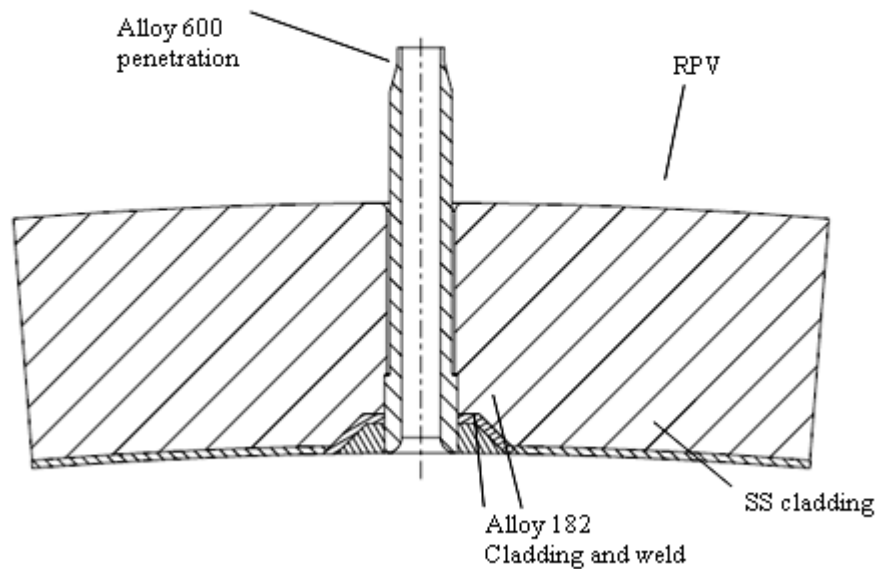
Principle design of a partially welded set-in nozzle.
